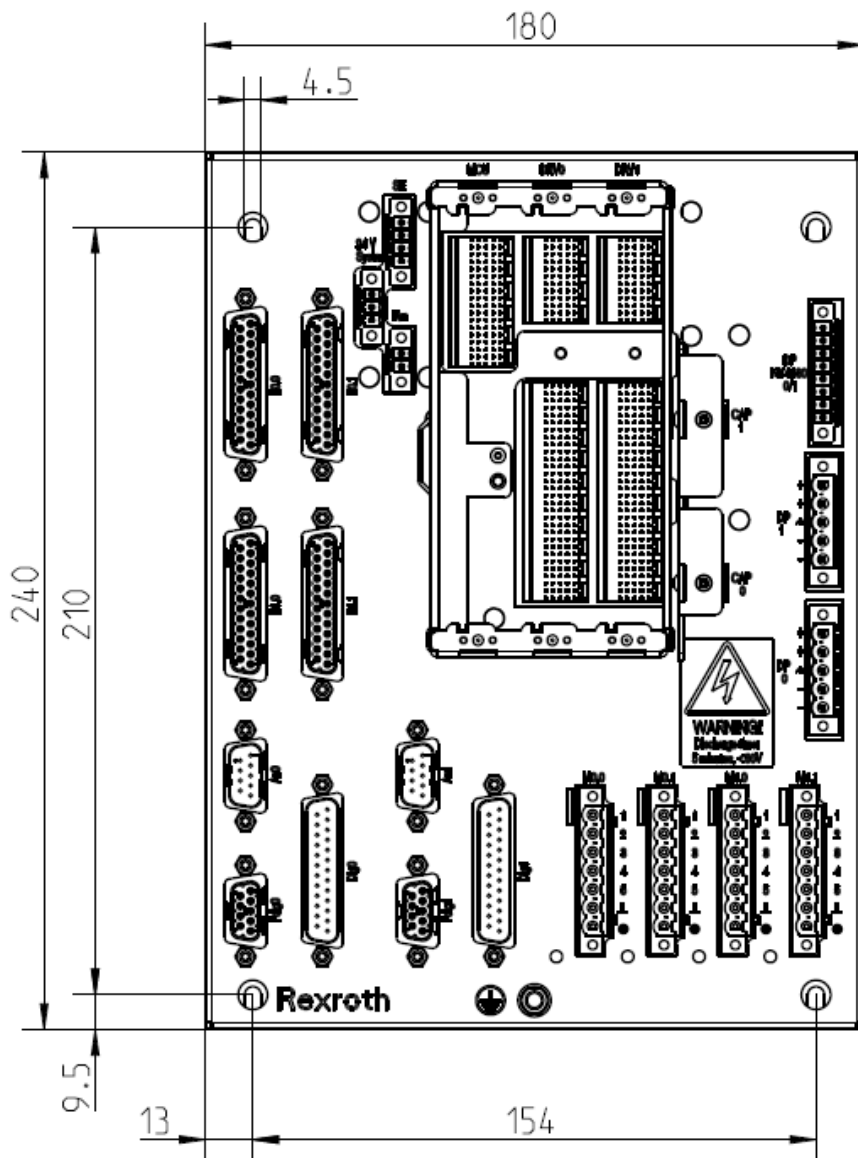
Dimensions (front view) of the NYS04.2-ST-02-ULNN-NY4023
